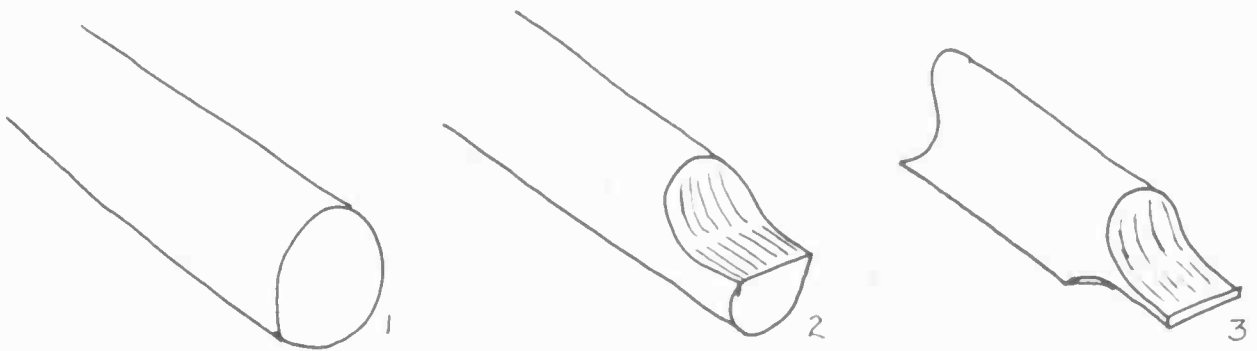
To grind screwdriver tips from tool steel drill rods: 1 Drill rod used as blank for gunsmith screwdrivers; 2 Use circular grinding wheel to grind one side drill rod; 3 Reverse rod, grind the other side.
